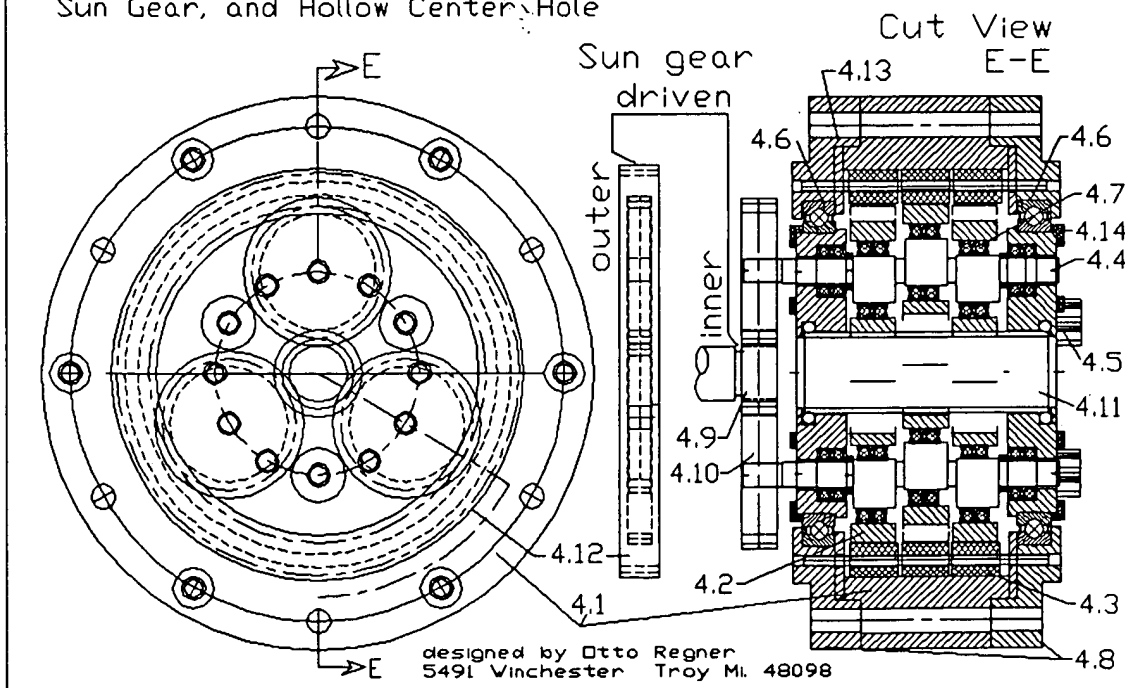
Center-Driven Cyclo Integrated Gear-Axes with 1 or 2 or 3 Disks, and Six Torque Bars with Low-Friction Bushings, and Pre-Loaded Cross-Roller Bearings.
